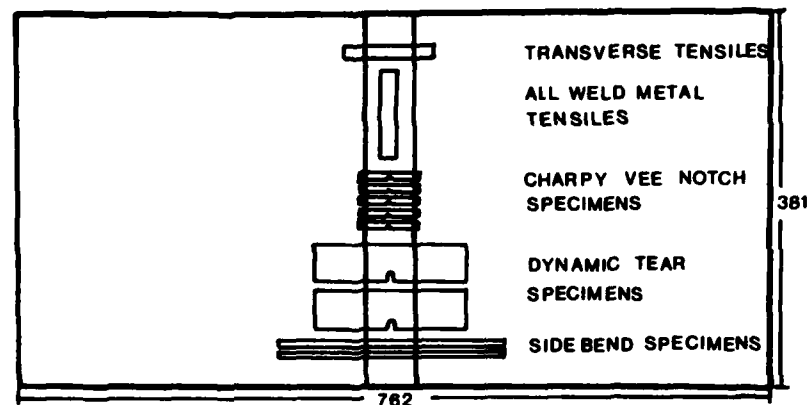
Location of mechanical test specimens in mechanical test weldment. With the exception of the side bend specimens, test pieces are removed from both sides of the plate. Dimensions are in mm.
